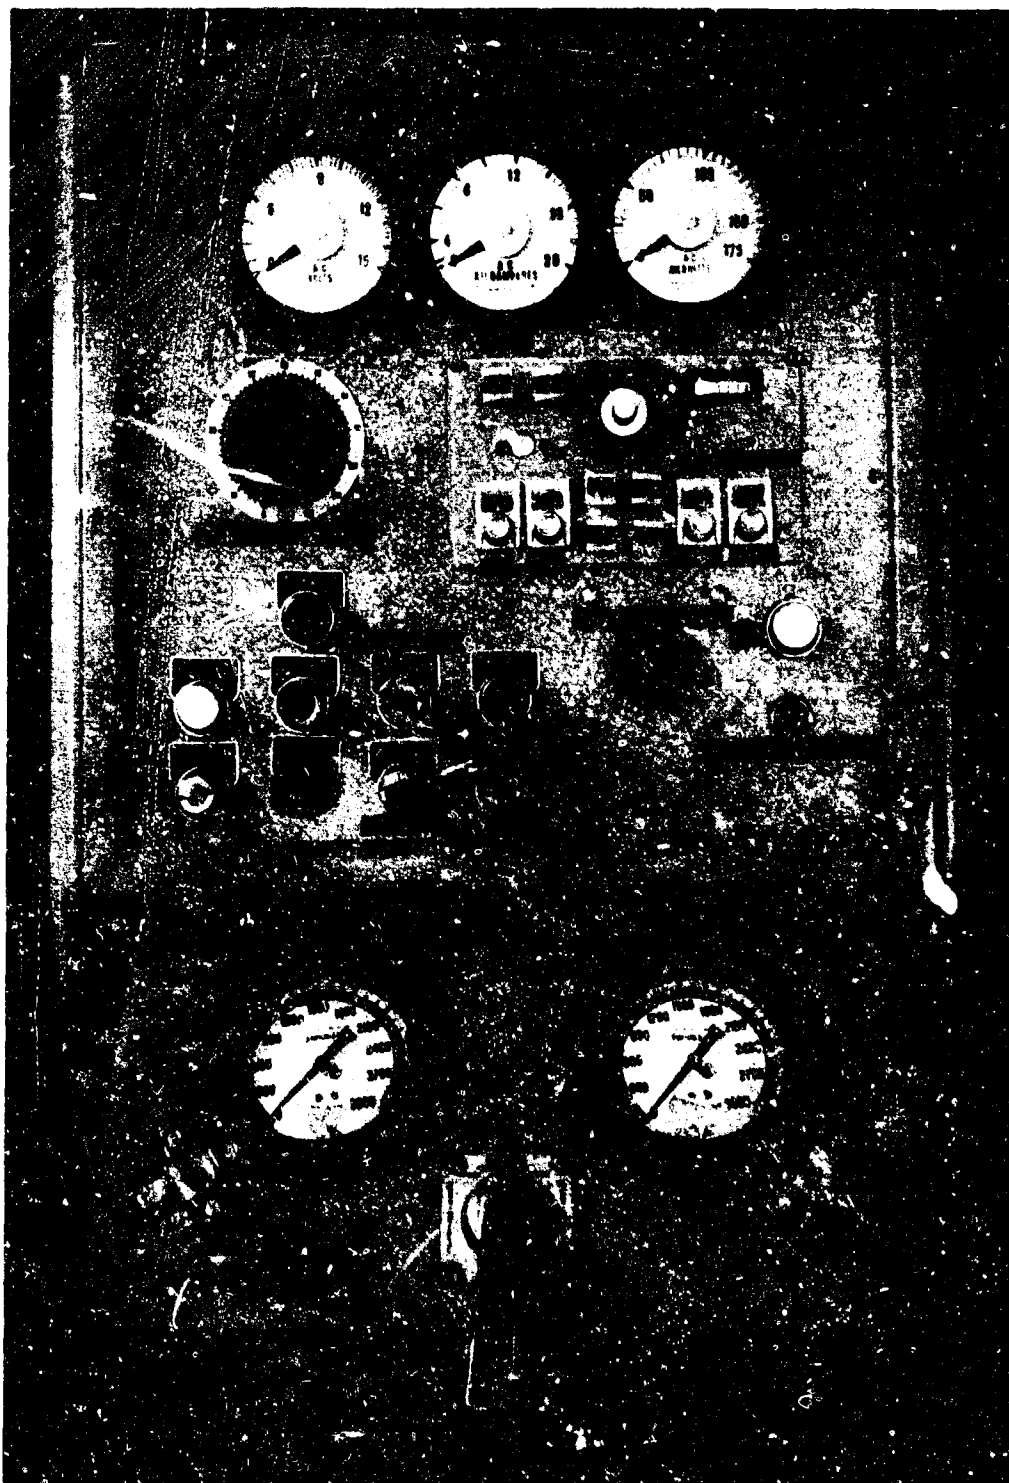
Close-up View of the Hot Press and Fusion-Casting Furnace Control Panel
